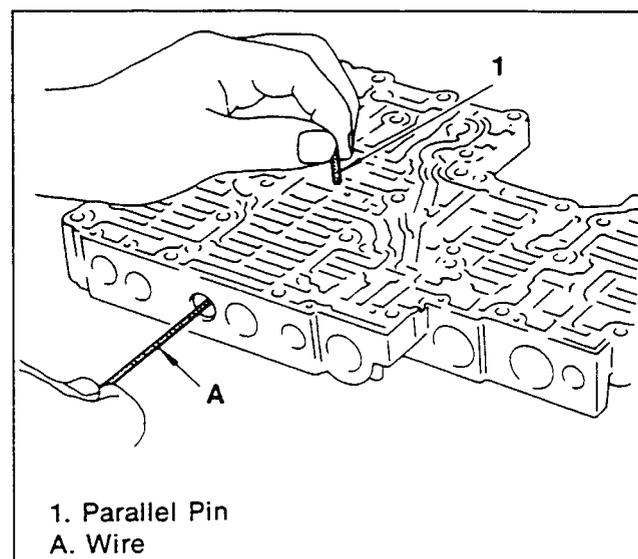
4-2 Sequence Valve and 4-2 Relay Valve Removal
